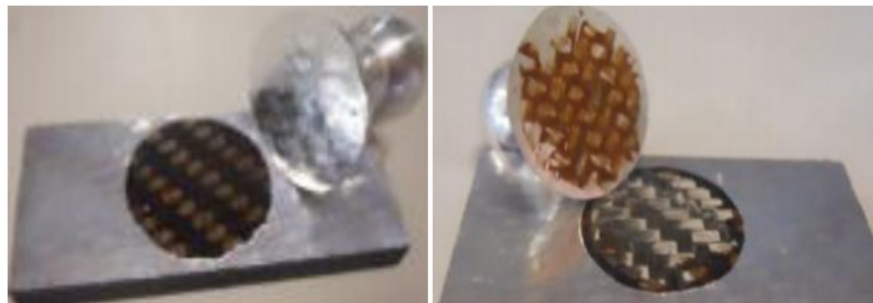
Fracture surface types between aluminum coating and composite surface without (left) and with (right) plasma activation [16].
